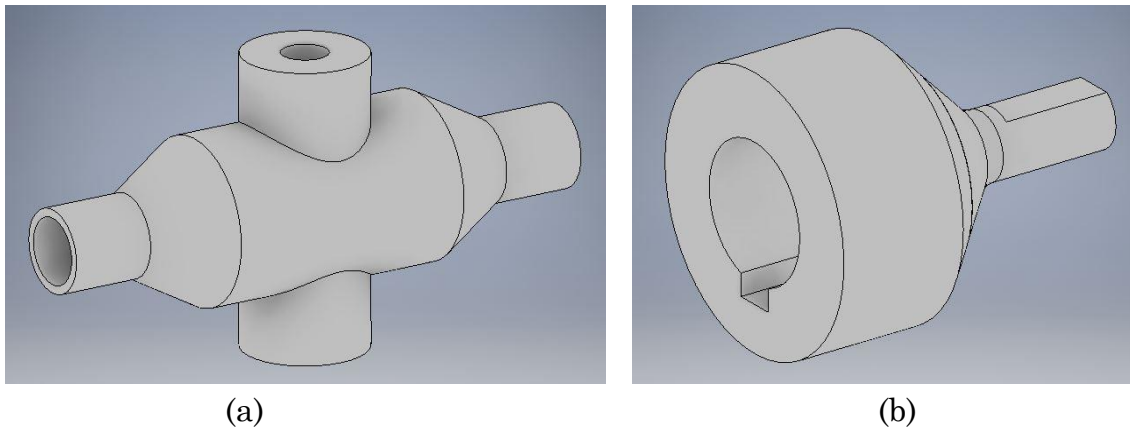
3D printed parts (a) inlet sensors manifold (b) Expander to torque meter coupling
